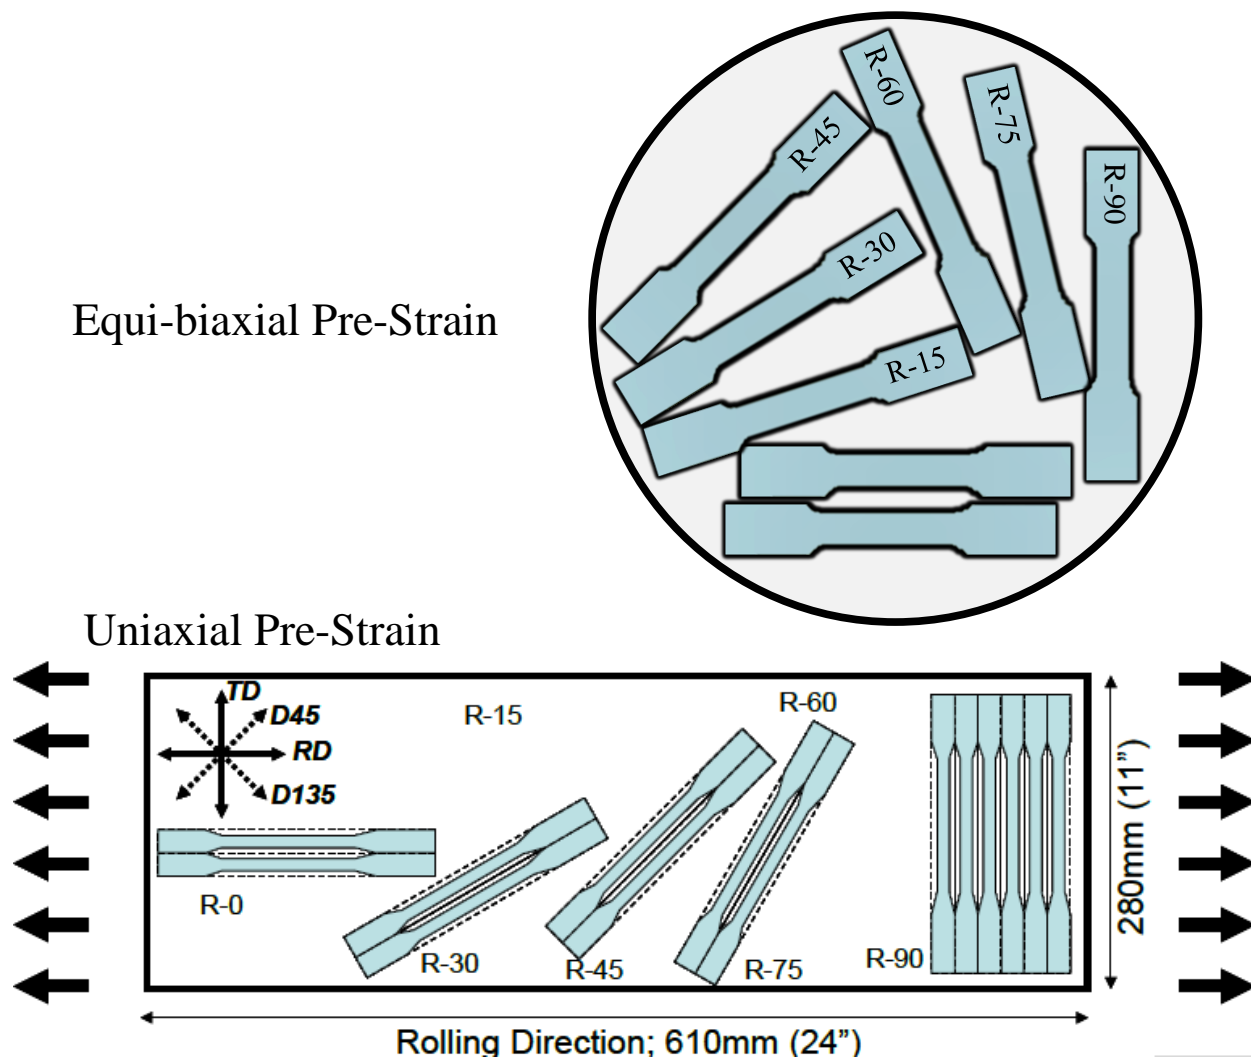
Schematic graph for the two-step uniaxial tension specimen cutting pattern. The big circle and rectangular indicate big specimens undergone bulge test and uniaxial tension, respectively, from which the second step uniaxial tension specimens were cut.
